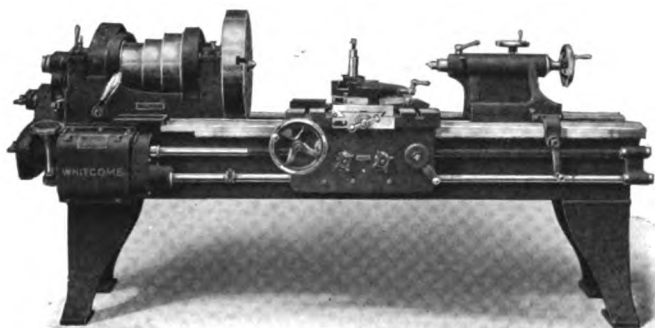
18-Inch Engine Lathe, Double Back-Geared, Quick Change Gear Mechanism
